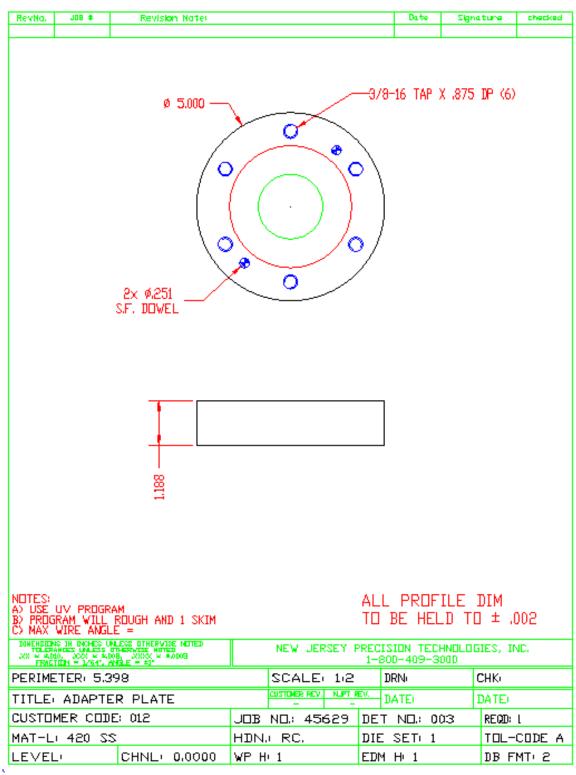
Drawing sheet generated for Job 45629 depicting Adapter plate.
